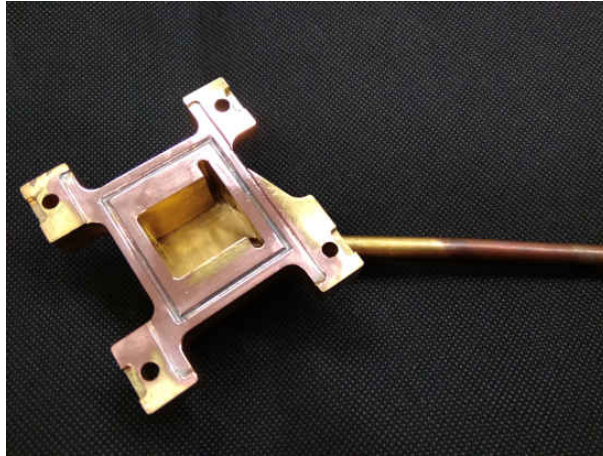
Polished surface of the chamber ready to seal the chip.
